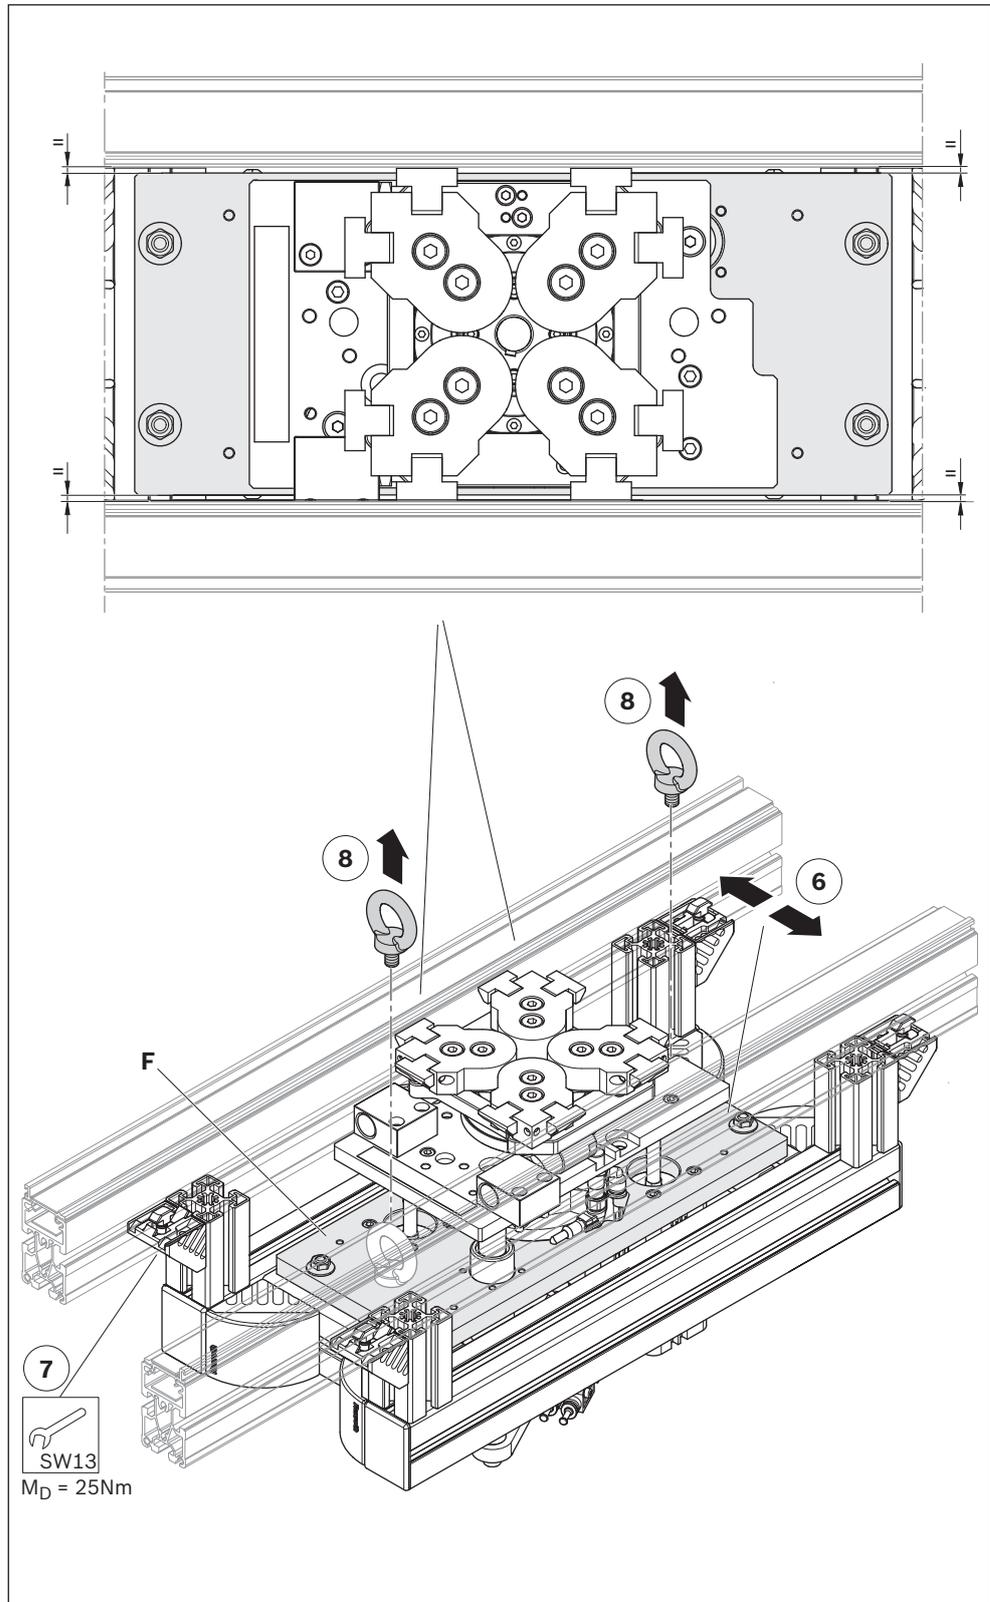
Adjust lift rotate unit HD 2/H size 1 in section ST 2 (example shown here size 1 180°)
